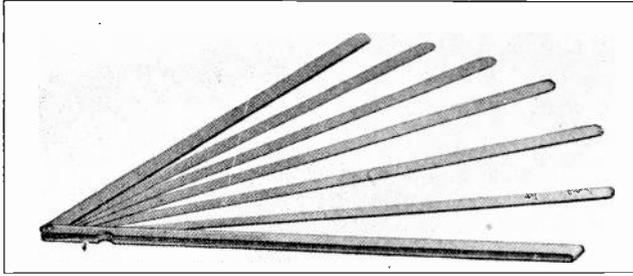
Common motor air gap gauge, for measuring clearance between the armature or rotor and the field poles or stator. Note the several different "feelers" or blades which are of different thicknesses.
